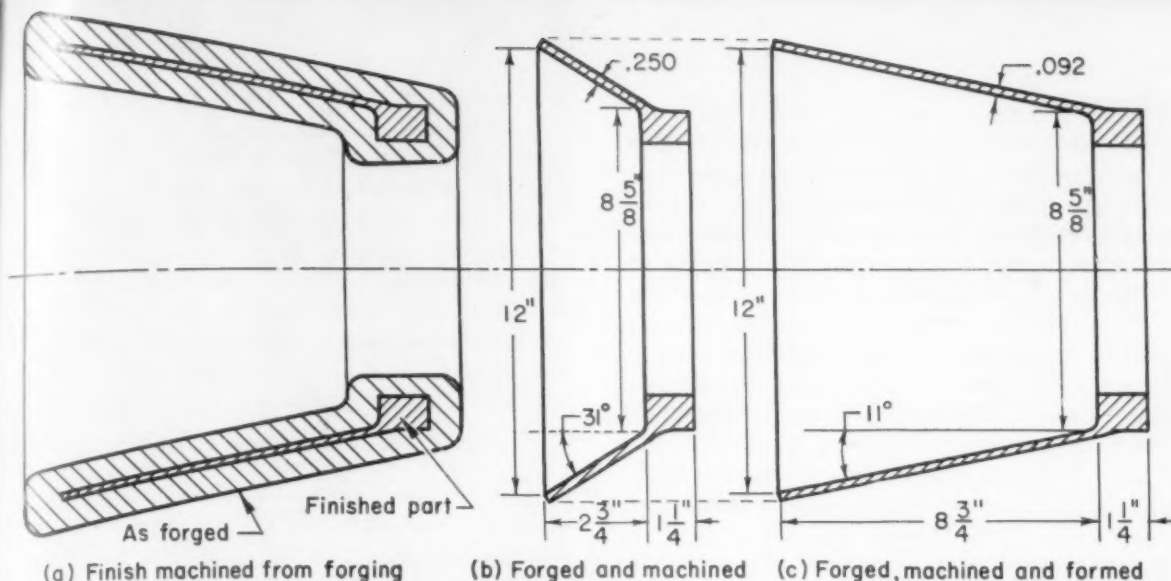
Flow turning was used to complement forging this part. Extensive machining was required when part was produced as at *a*. Forging dies were expensive and damage excessive. Part was more easily forged and machined as shown in *b*, then flow turned to final form as in *c*.
